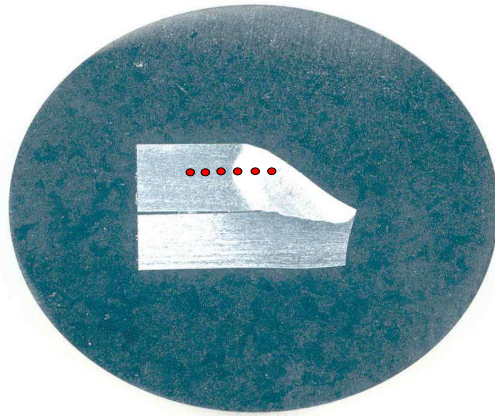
Micro Vickers hardness of 500Kg fracture-tested specimen
